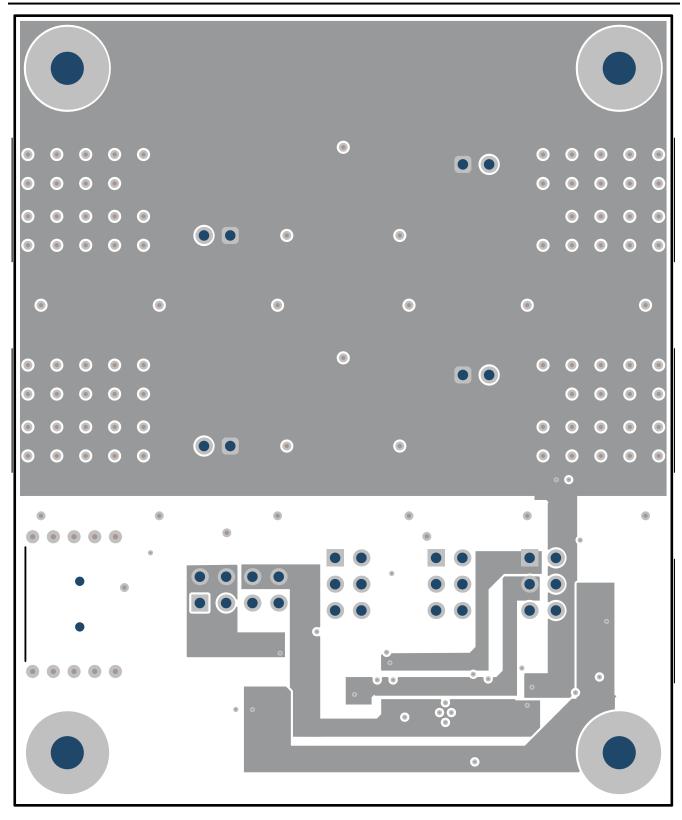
PCB Layout Example From CDC6 EVM - Power Layer
